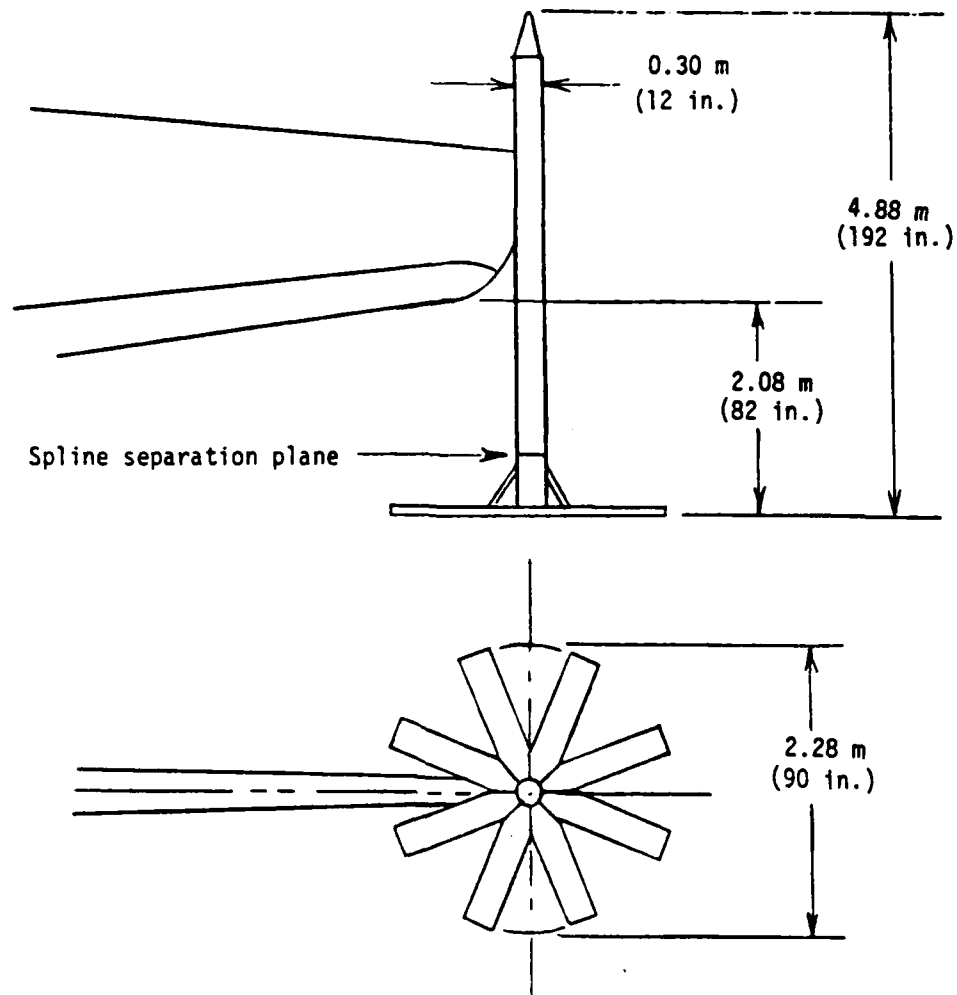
Sketch of Spline Assembly at Wingtip [Ref. 38].
